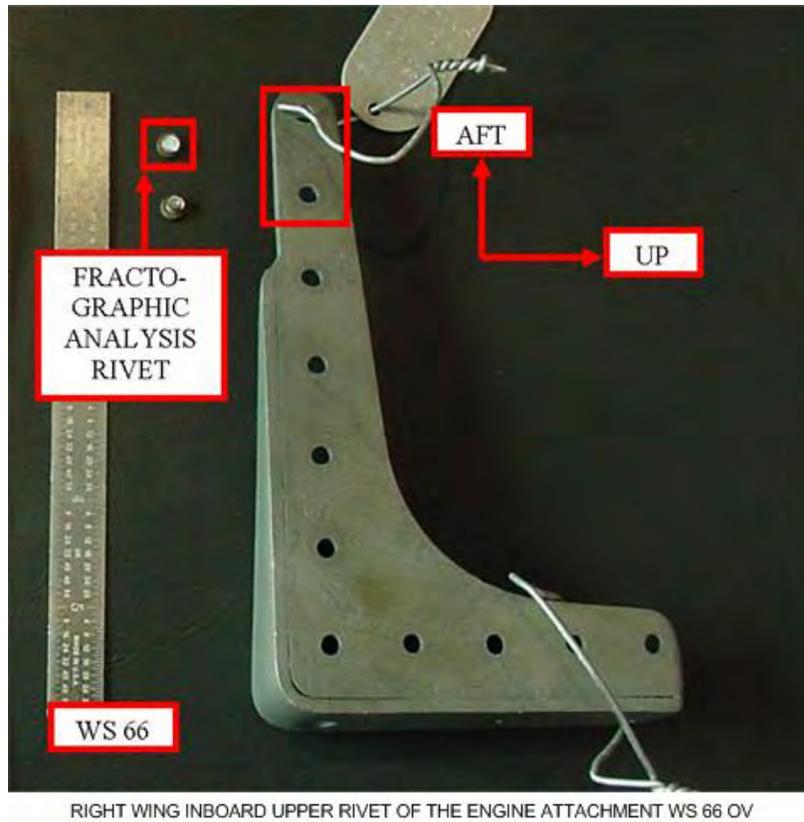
Location of Right Wing Inboard Upper Rivet of the Engine Attachment WS 66
